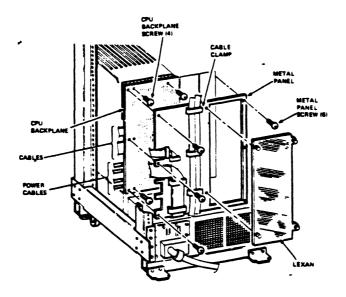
CABINET BACKPLANE REMOVAL
